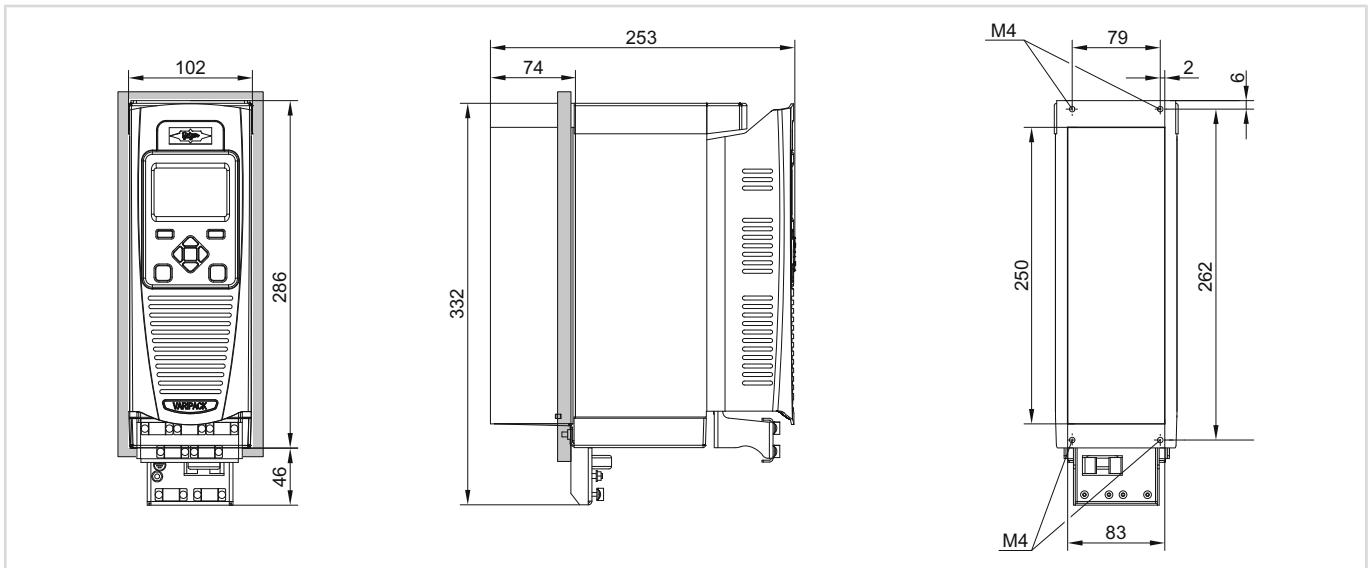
Dimensional drawing FDU+6, FDU+12 for through-switch cabinet mounting (with optional control panel)
